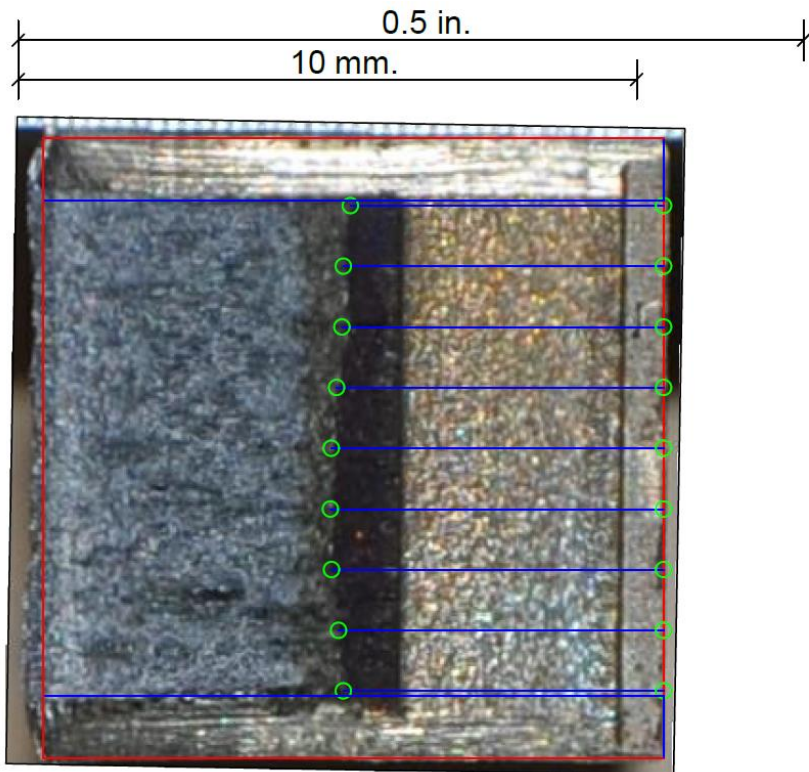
Specimen R12' Fracture Surface
